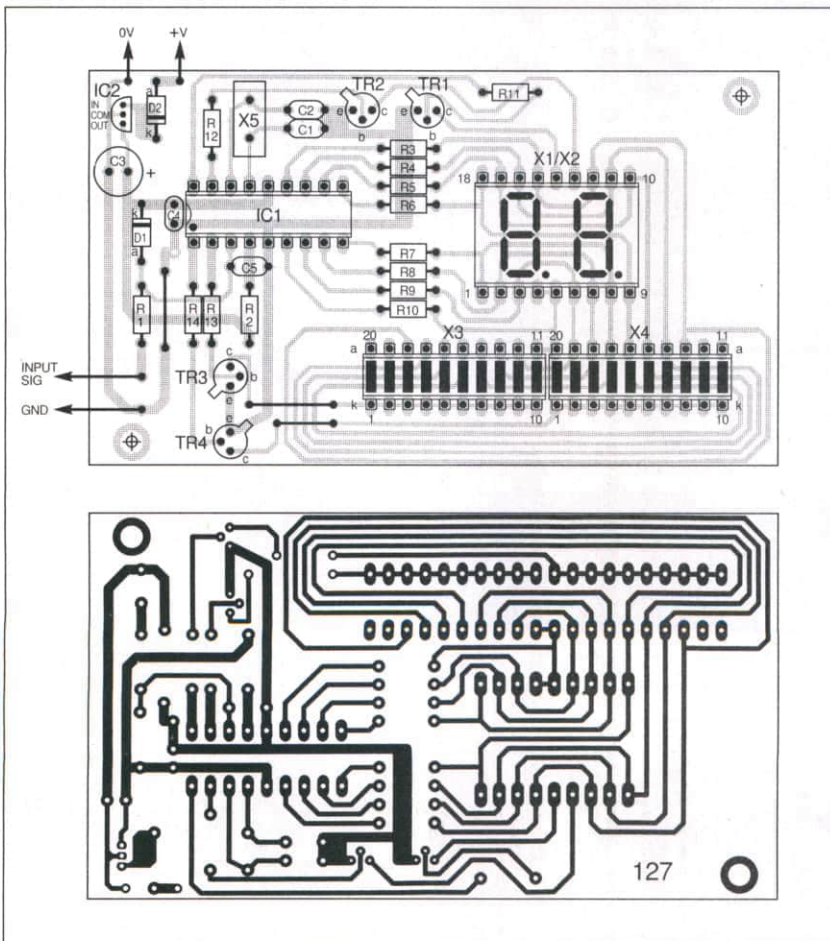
Printed circuit board component layout and full size copper foil master for the PIC Digital/Analogue Tachometer.
